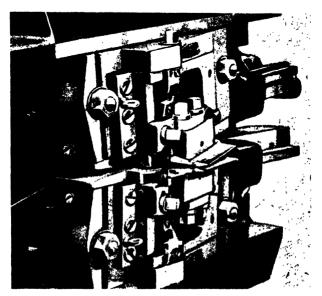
Tools and Tool Slides. 12 in. Straight Bevel Gear Generator (Gleason)
